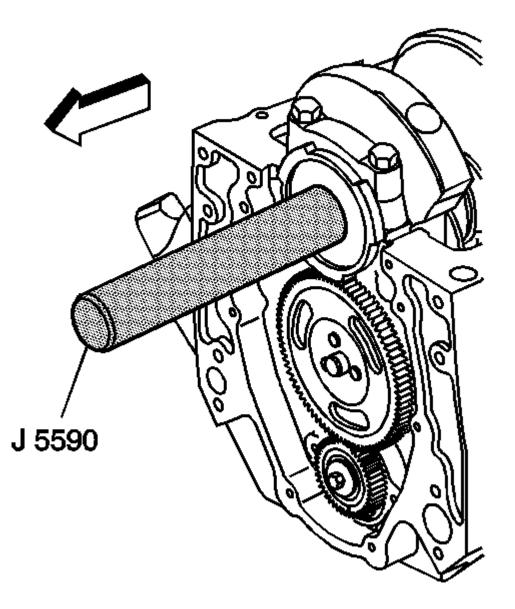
Installing CKP Sensor Reluctor Ring Onto The Crankshaft Using J 5590 Courtesy of GENERAL MOTORS CORP.
